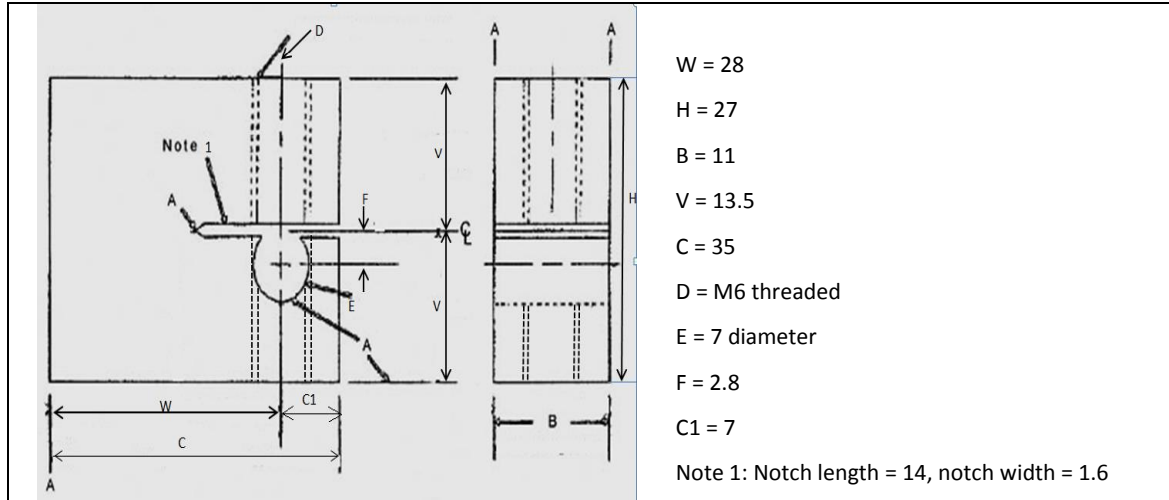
Bolt-loaded WOL specimen dimensions (17).
